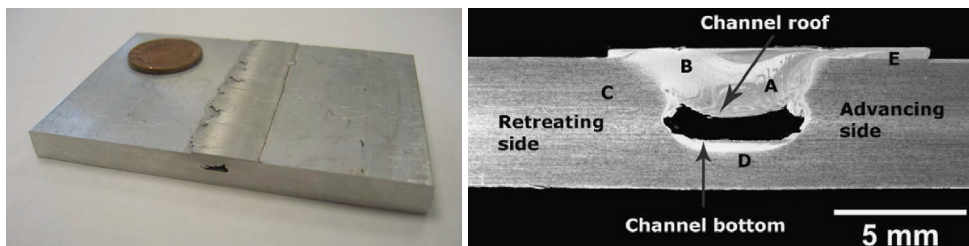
Left) A channel fabricated using friction stir channeling technique [50], right) cross-sectional image of a channel [49].
